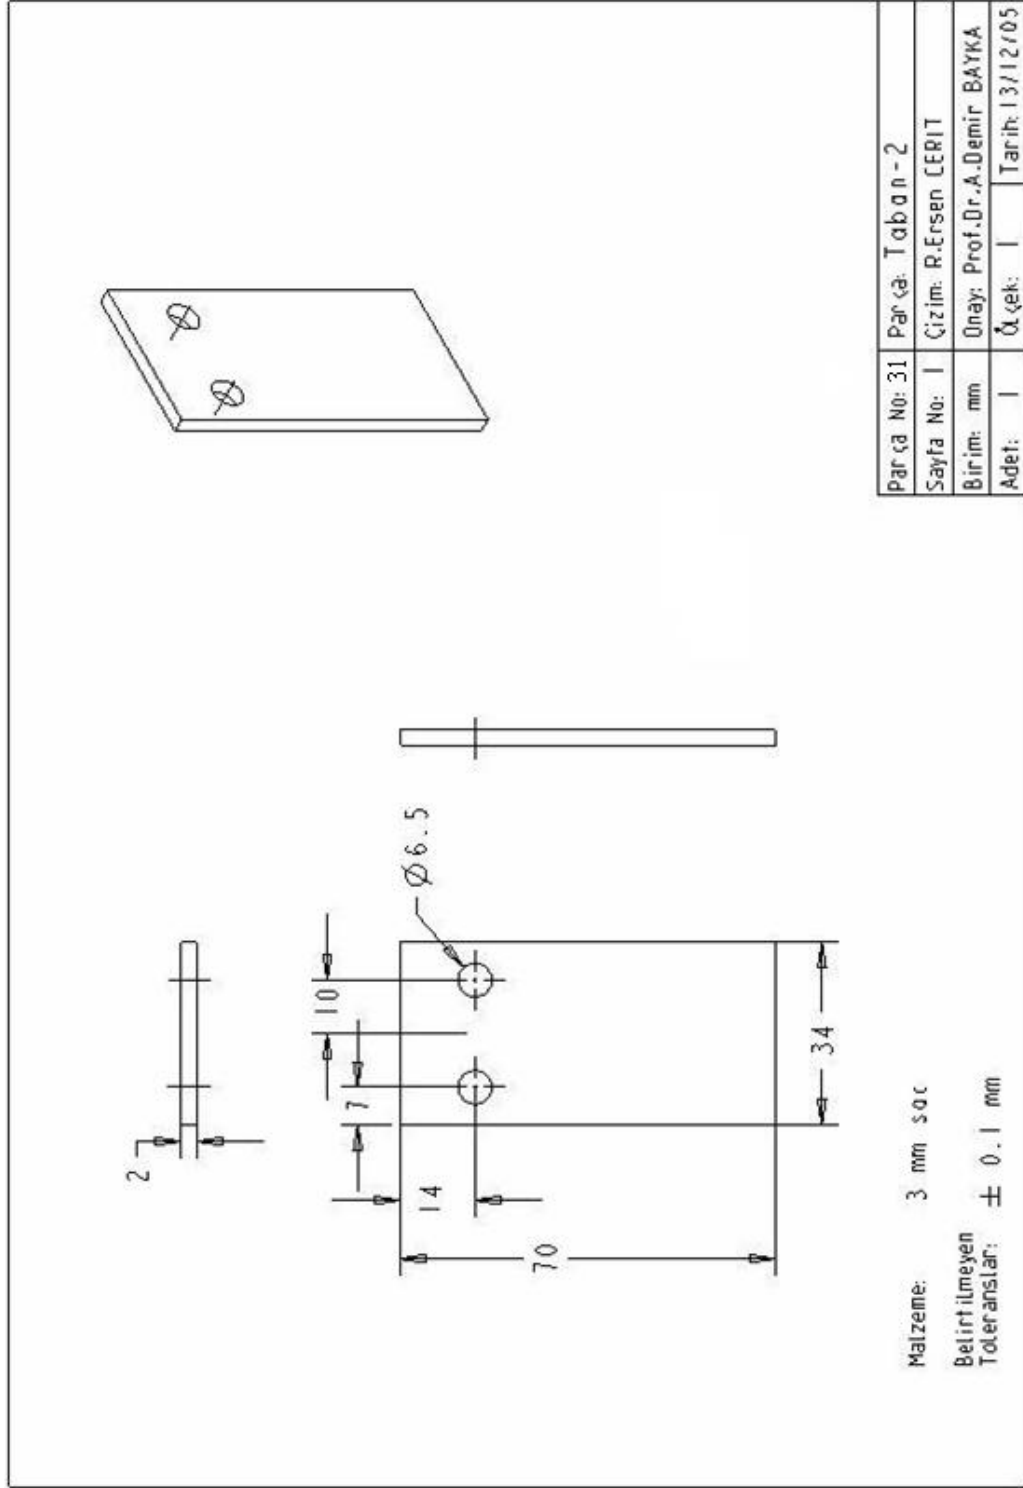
Technical Drawing of Piston Support on Filter Holder.
